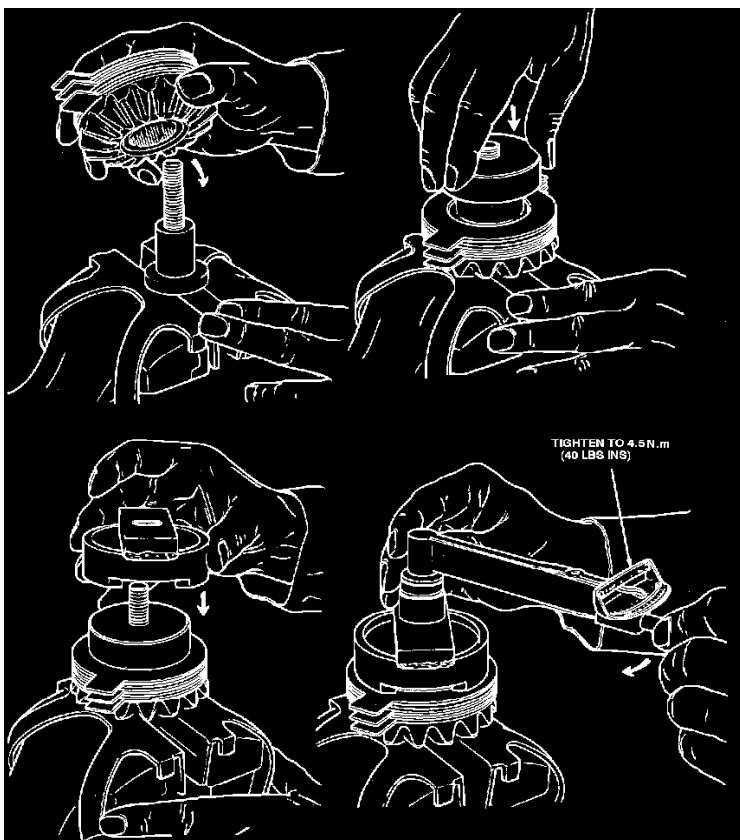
Installing Tool T80P-4946- Or Equivalent To Measure Shim Thickness
